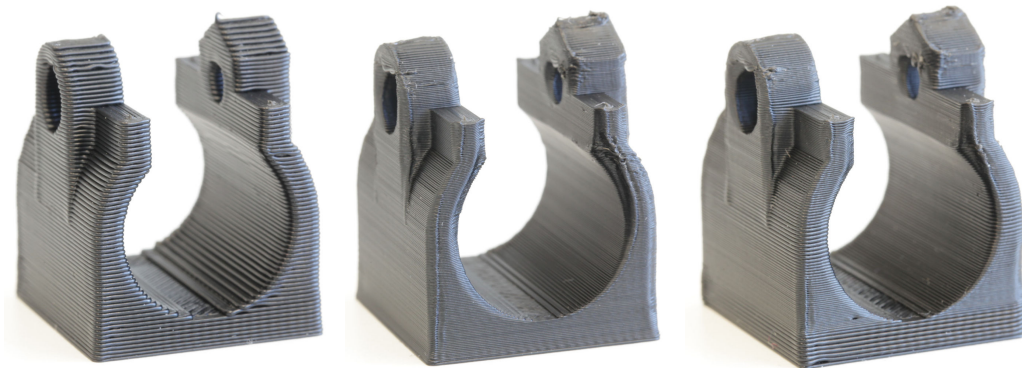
Bearing holder object, printed with maximum (left), minimum (center) and adaptive layer height (right)
